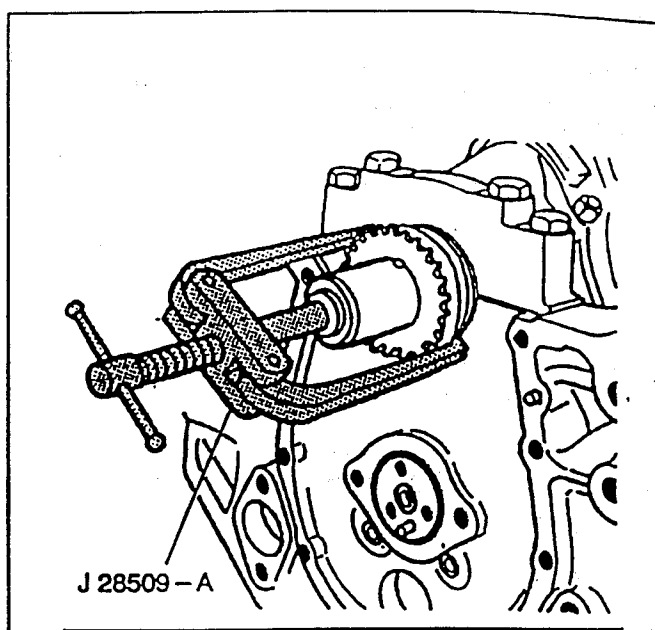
Crankshaft Sprocket Replacement (7.4L Engines)
